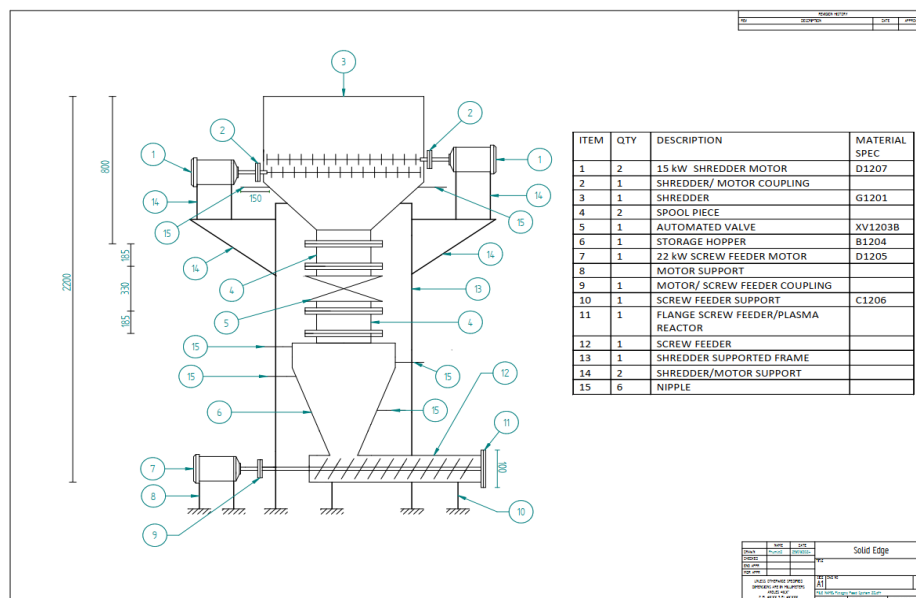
Shredder, feed-hopper and screw-feeder 2D sketch
